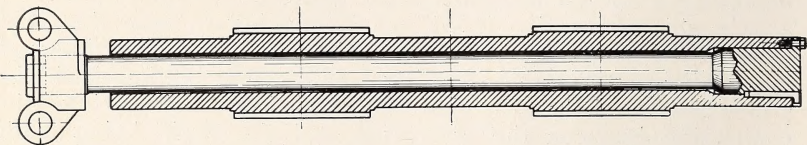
Drawing showing Construction of Pinion and Flexible Pinion Shaft.
